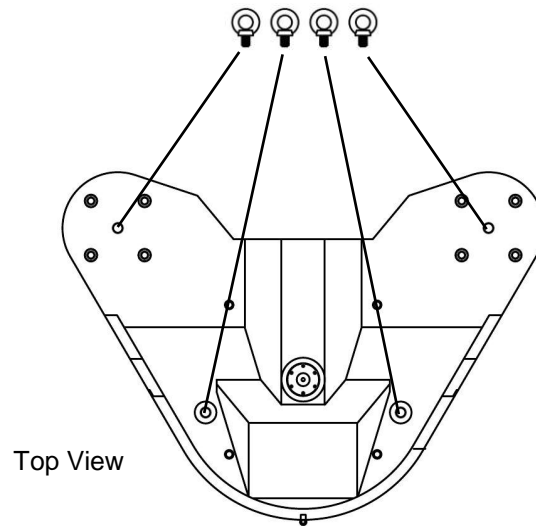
Lifting Eye-Bolts and Fixing Locations on Magnet Body
